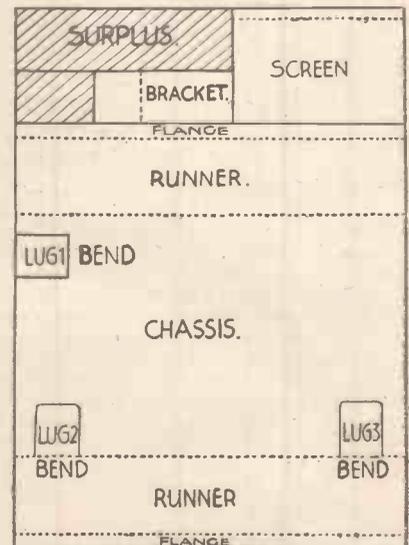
Marking out the chassis, etc., on the aluminium sheet.
